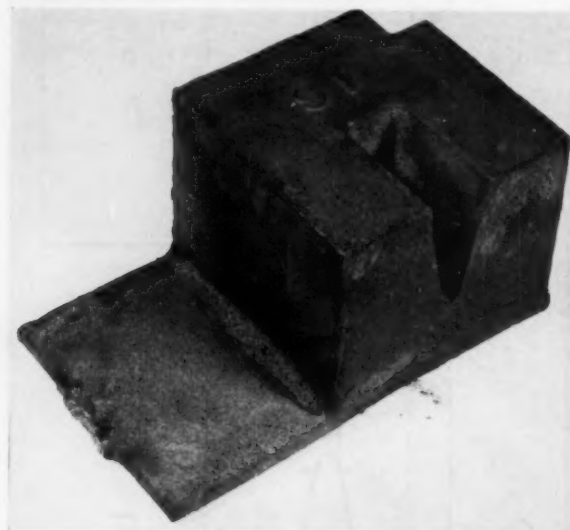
Control casting S-1, showing large scab in fillet E. Moisture was principal variant in tests.
